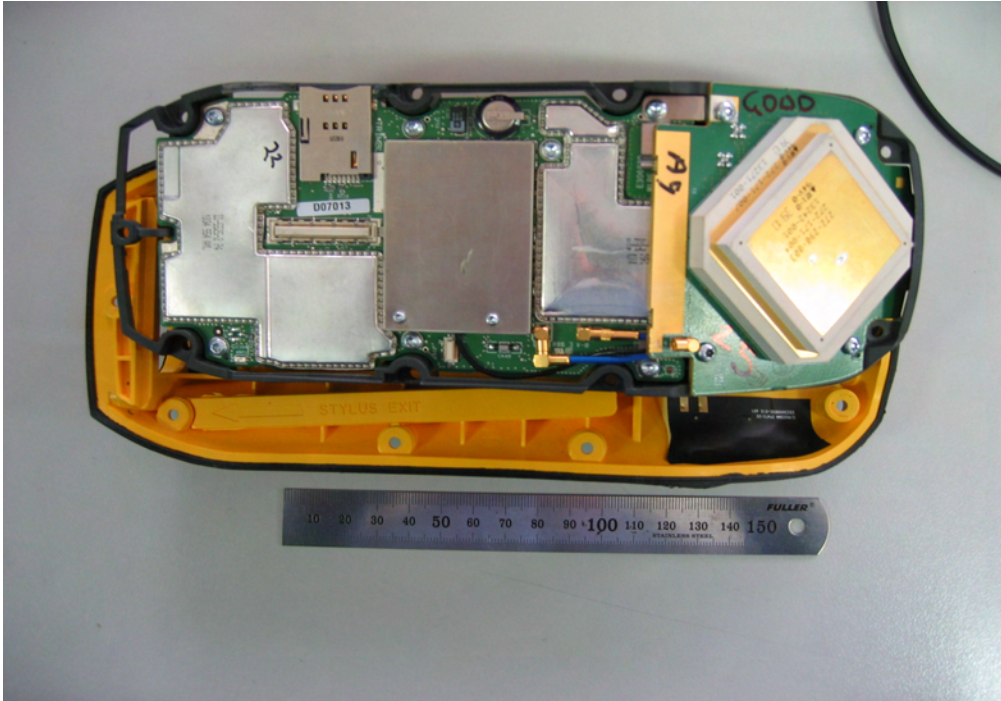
Top view of Chassis showing GNSS antenna and Main Board
